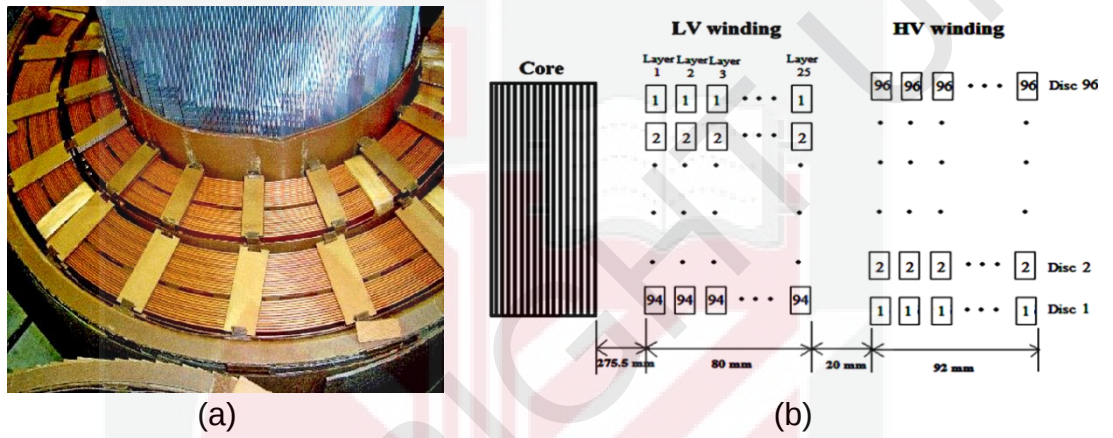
(a) Actual and (b) front cross-section view of the single-phase 33/11 kV windings
